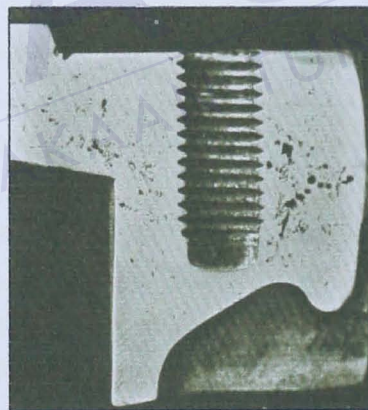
Gas Holes in an Aluminium Alloy Casting Cross-Section
